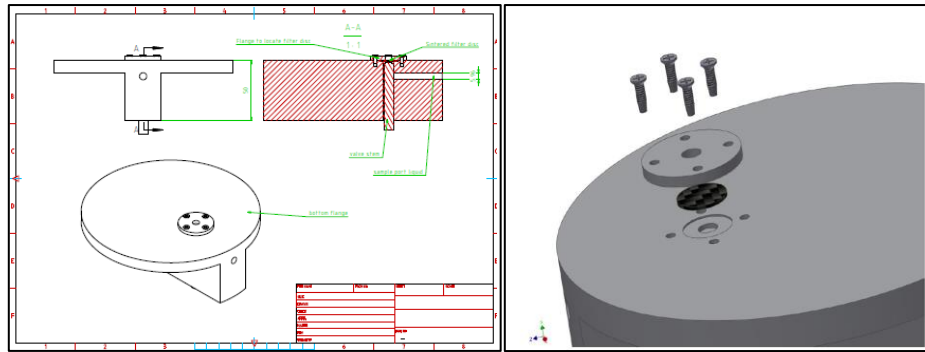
Initial drawings of the bottom flange and housing for the screen (3-D drawings drawn in Autodesk Inventor by Dr Nelson, 2017).
